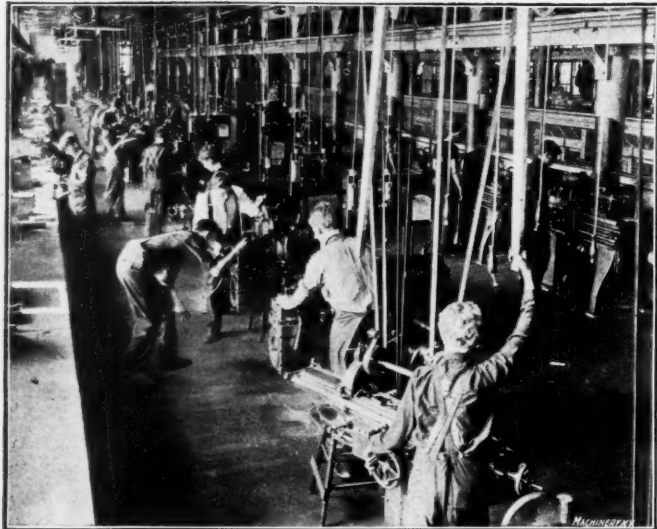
Lathes, Shapers and Grinding Machines in the School Shop.
